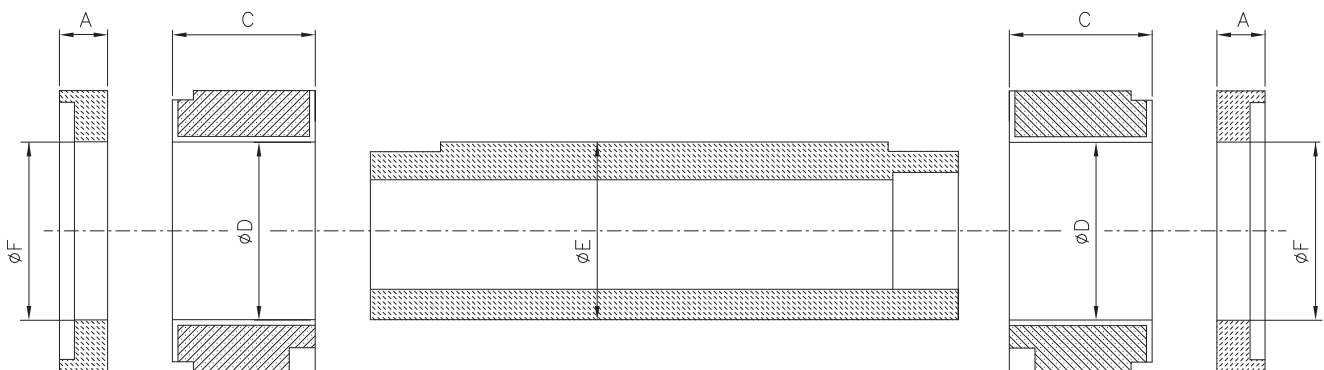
Thrust bearings, bearing sleeve and shaft are wear parts.
